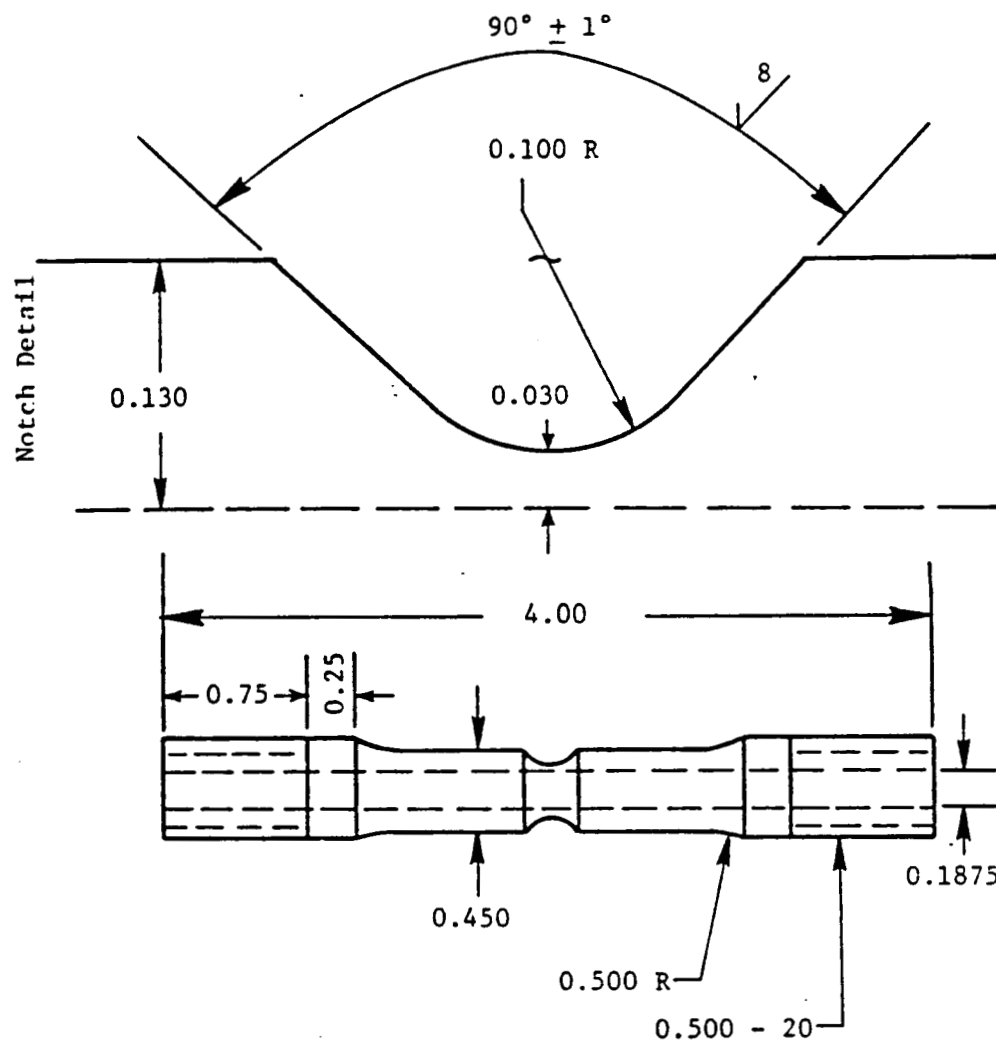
Axisymmetric, Notched Thin Wall Test Specimen.
